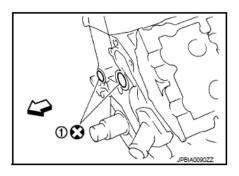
Identifying O-Rings Of Cylinder Block Courtesy of NISSAN MOTOR CO., U.S.A.
